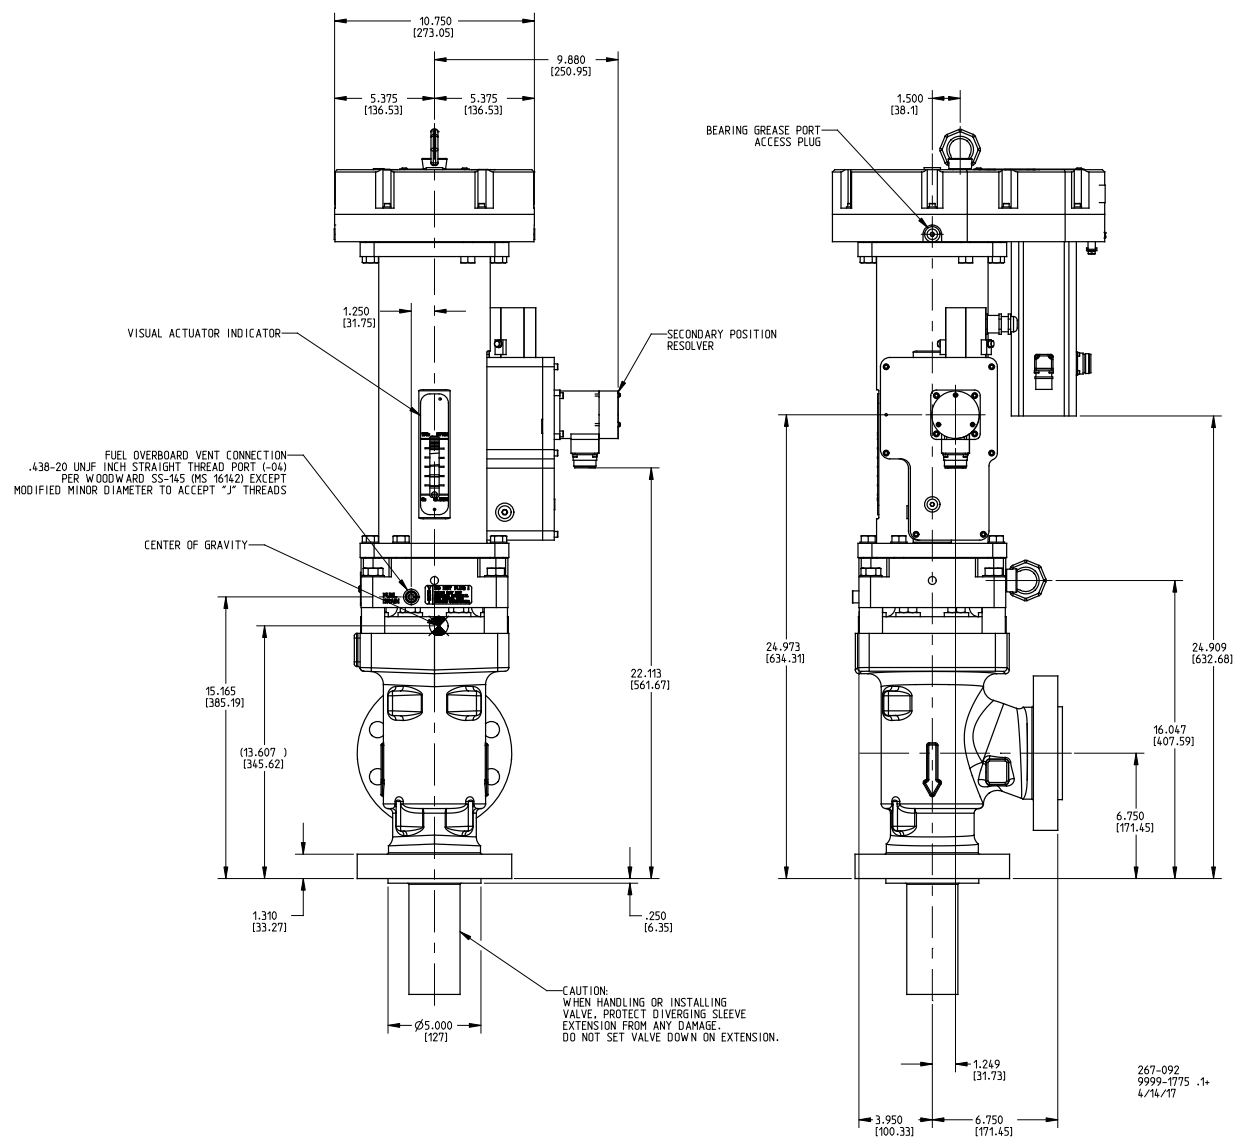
Outline Drawing (3-inch UHR LESV)
